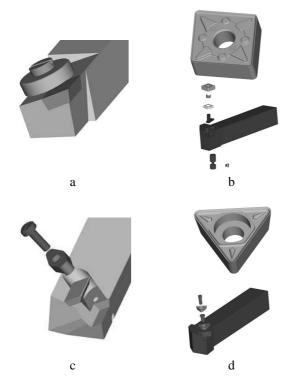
Tools used for experimental verification: a - Prof. Vasilko tool; b - mass produced tool for soft finishing; c - authors tool; d - mass produced tool for roughing.
